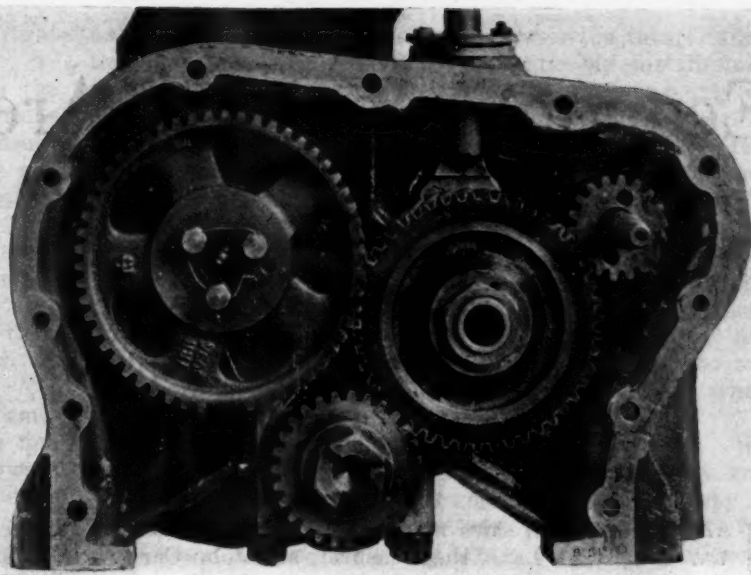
Typical arrangement of molded-on-the-hub type idler gear in a four-gear timing train
